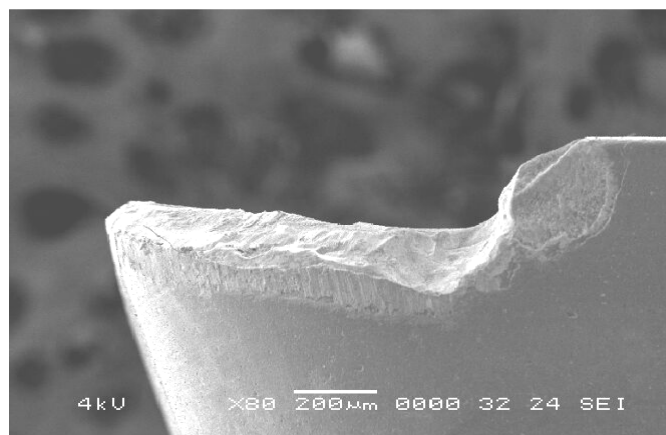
Tool wear observed after machining without preheating with cutting length of 300 mm [$V = 56.57$ m/min, $f = 0.1$ mm/th, $d = 1.00$ mm]
